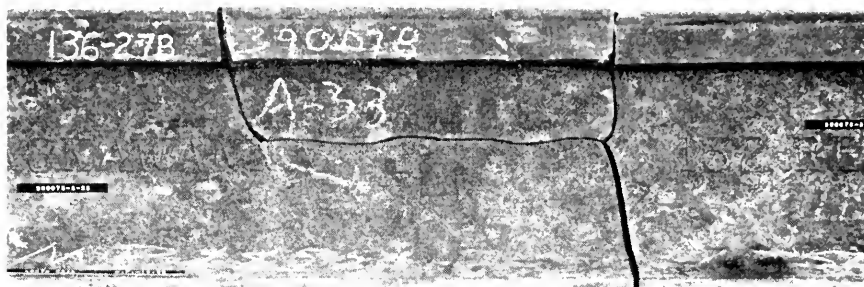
(Investigation 136-27, Sample B)—Side view of a failed electric flash butt welded rail joint. This fracture started at the weld and progressed in a horizontal plane along the neutral axis, then veered toward the head in the east rail and towards the head and base in the west rail.
